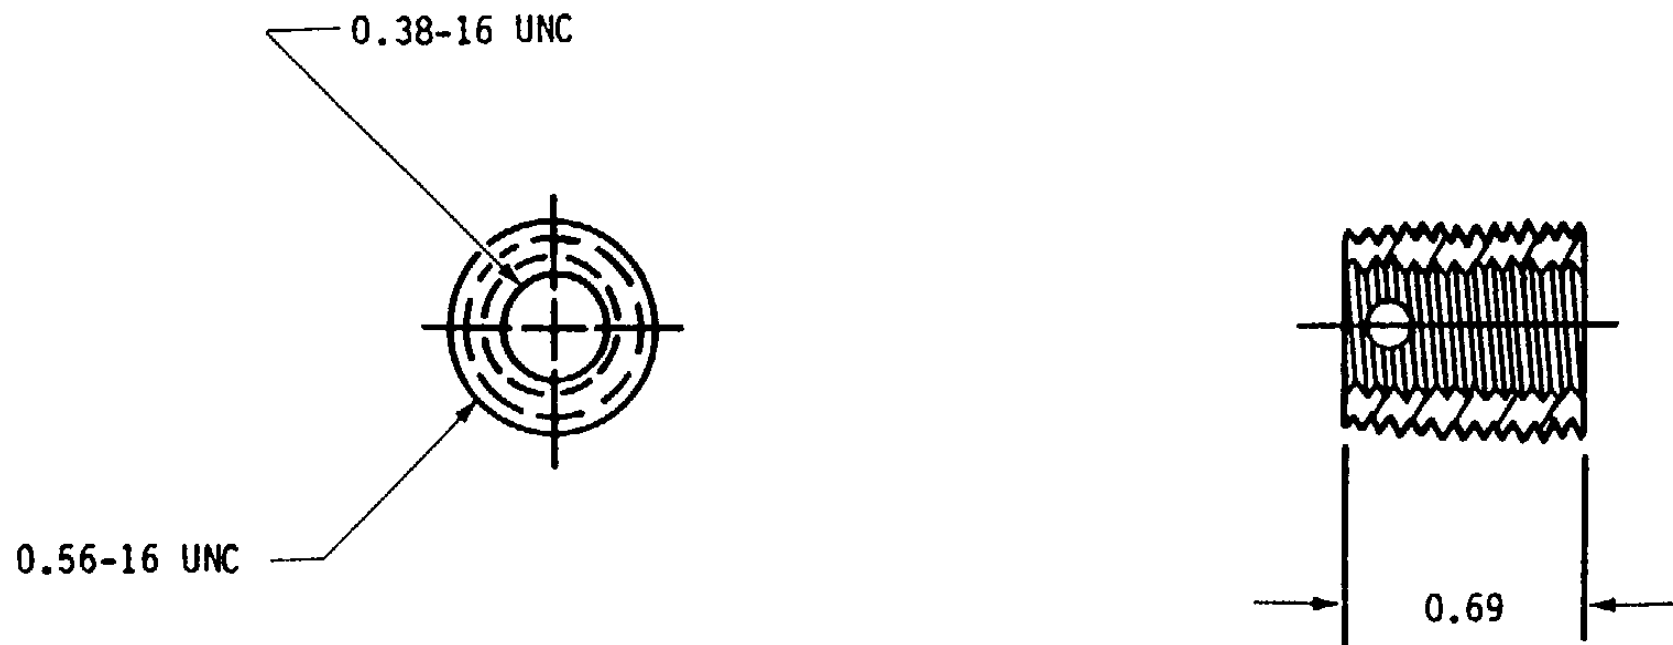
Dimensions for insert, 11021215, unit 2, ISO-2-1.
